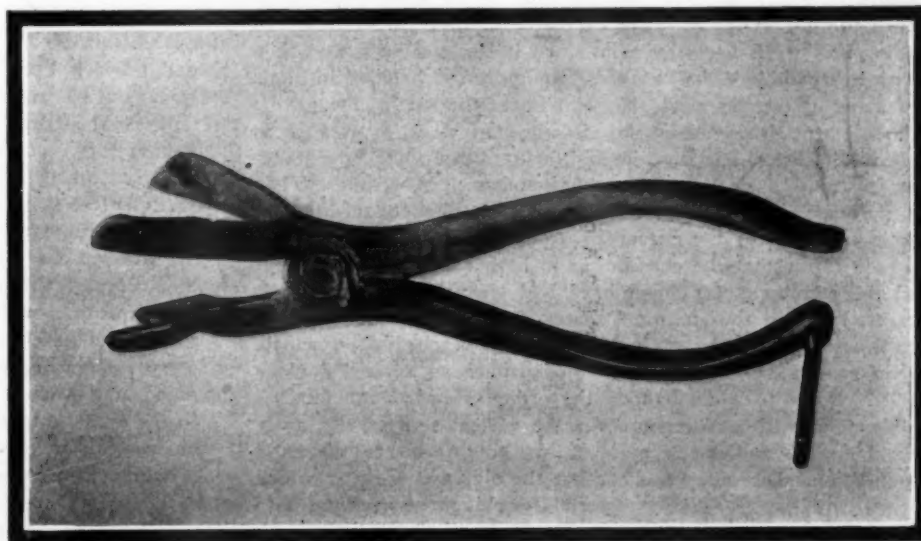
Cleaning and grinding in valves is often deferred owing to the difficulty experienced in removing the valve springs. The valve remover shown in this illustration works in the opposite manner to a pair of pliers in that by compressing the handle the jaws open and so lift the spring cups.
